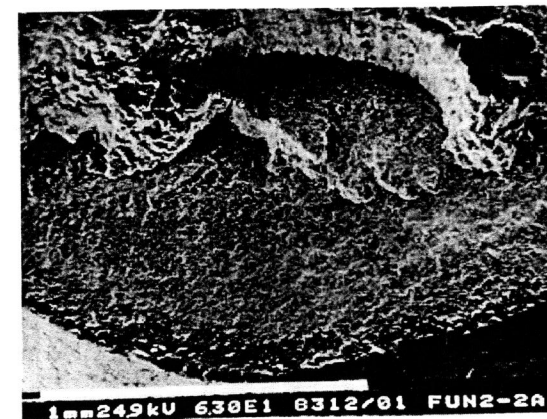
Magnification of fracture zone of Fig. 1. Secondary cracks may be observed.
